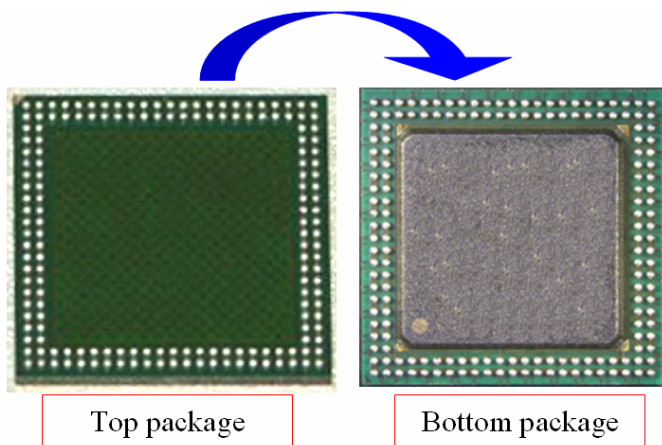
The packages shown before stacking. The bottom package on the right shows the bumped SOP adjacent to the center pin-gate molded cap.
